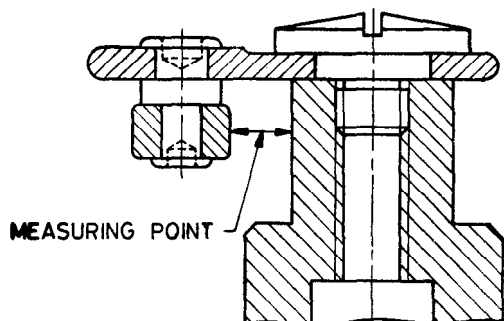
METHOD OF MEASUREMENT OF CENTRE DISTANCE BETWEEN AXIS OF HOLE FOR SCREW AND ROLLER ( DIMENSIONS C )
